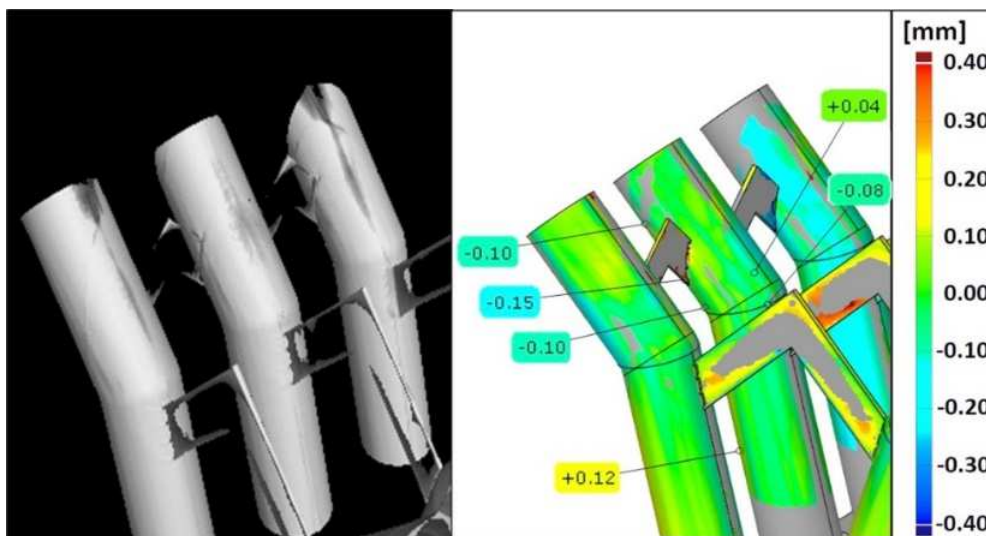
Geometric distortion analysis. a) computed tomography scan of LPBF workpiece, b) dimensional control or LPBF workpiece.
